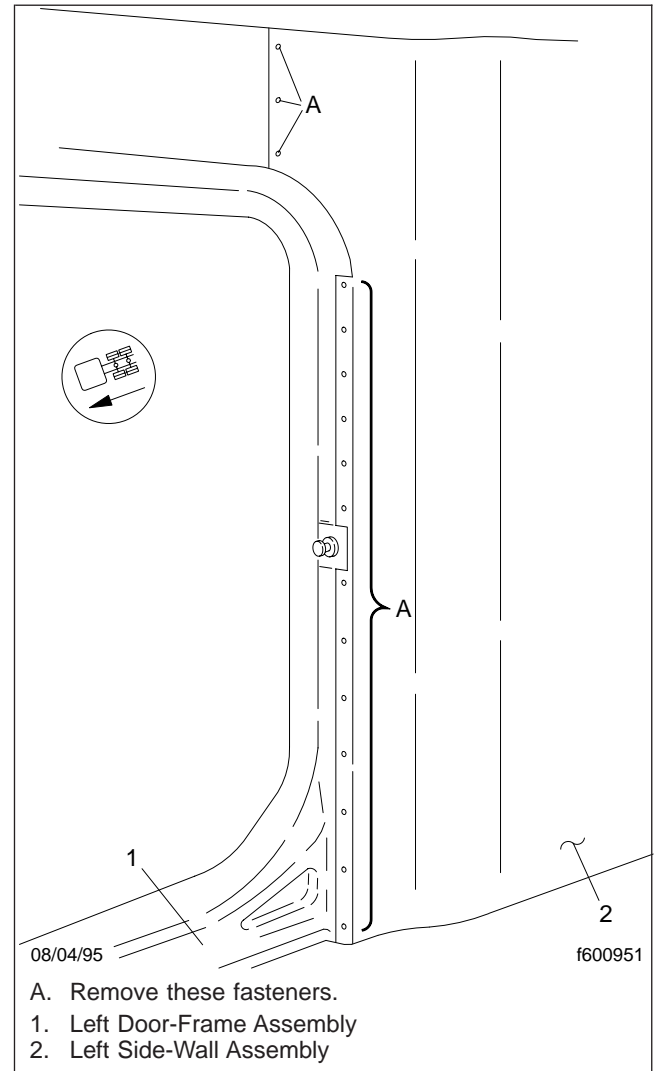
, Side-Wall to Door Frame Henrob® Rivets
